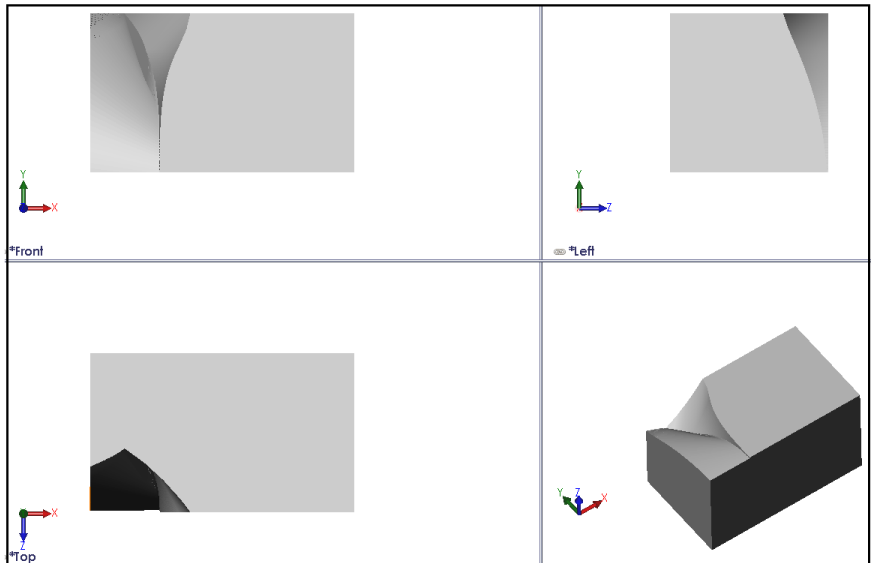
Output for tool path in Annexure 2 for flat end mill cutter.
